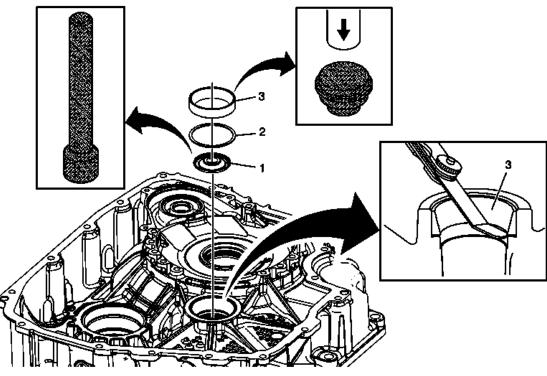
View Of Front Differential Drive Pinion Bearing Cup, Washer & Lube Dam Courtesy of GENERAL MOTORS COMPANY
